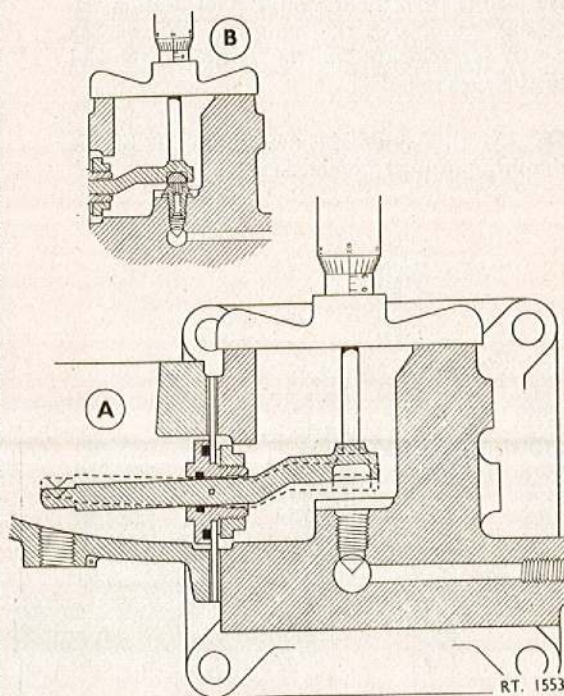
Method of checking half-ball valve setting (post-Mod. 217)
